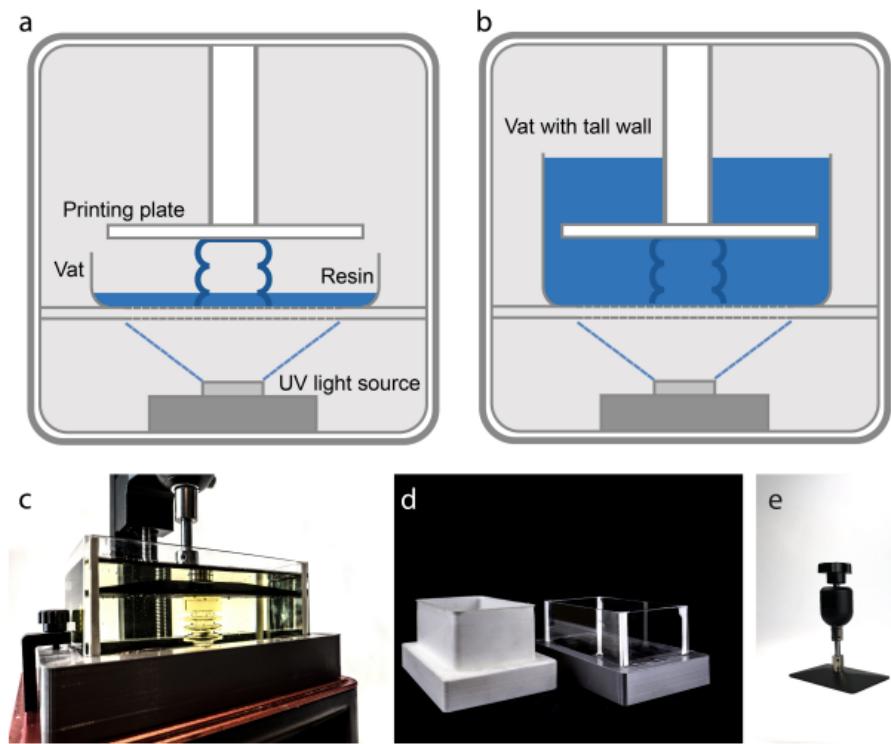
a) The conventional SLA 3D printer structure; b) the *Submerged Printing* process; c) the modified printer assembly filled with standard transparent resin for a clear presentation; and d) the modified vat made with PLA and acrylics; e) the extended printing plate.
